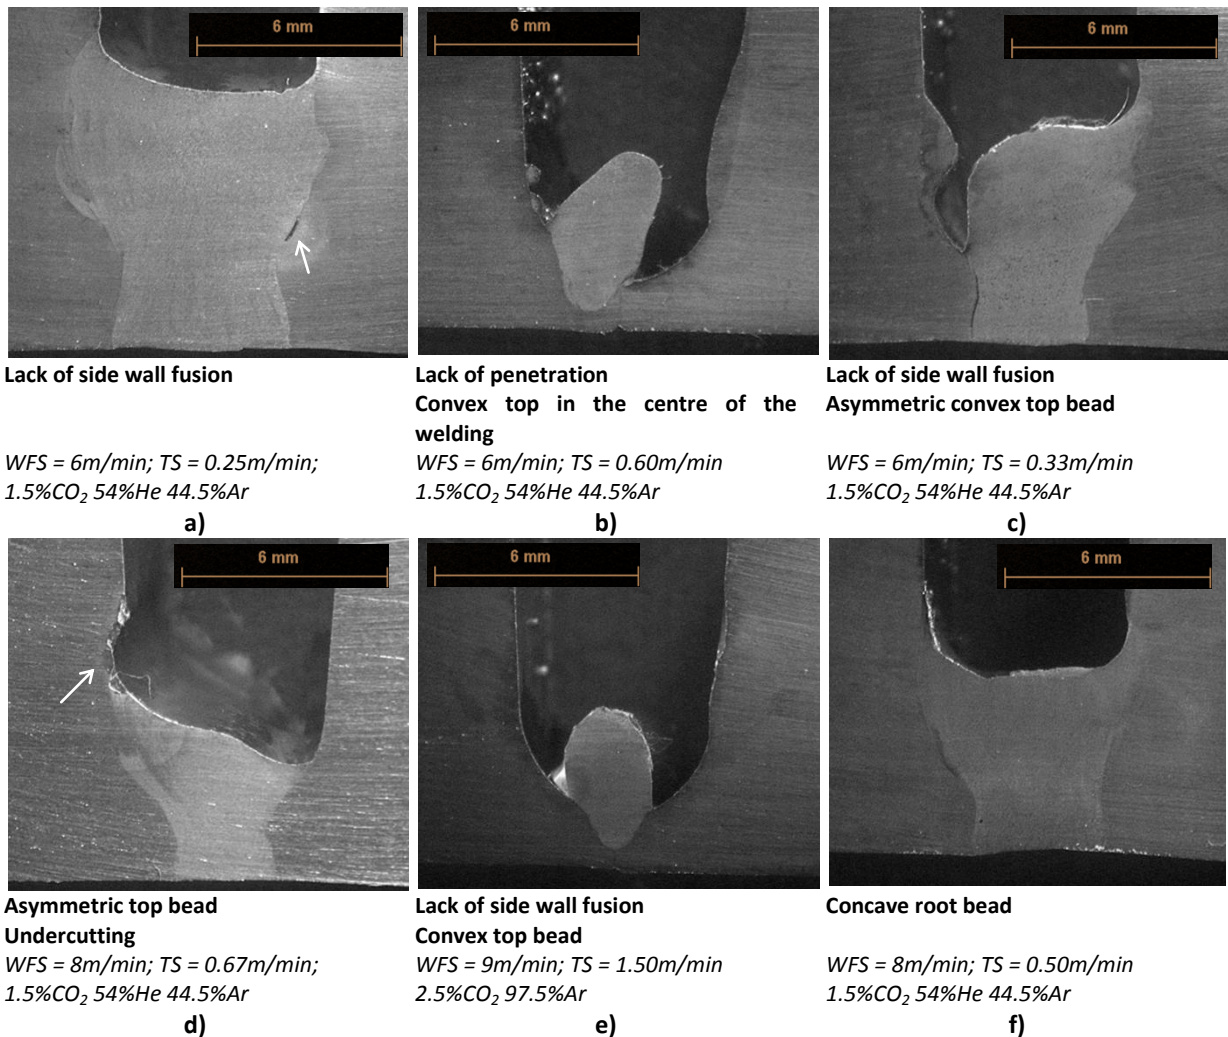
Macrostructures illustrating defects on welding of narrow groove pipe using GMAW-P.
